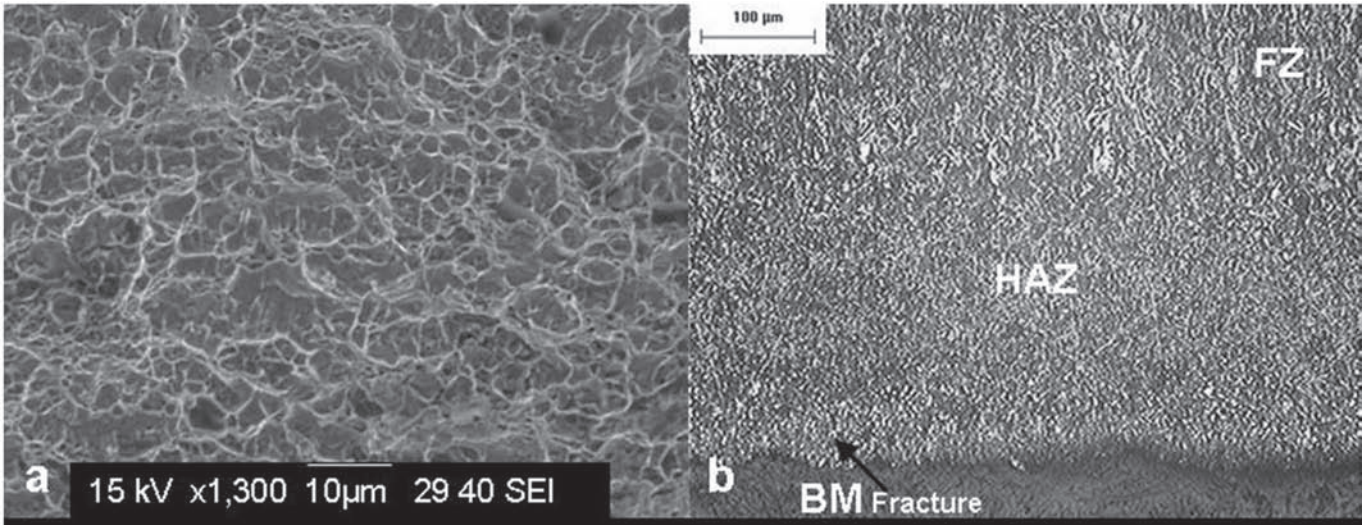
(a) SEM micrograph showing the ductile fracture appearance of the BM consisting of a typical dimple fracture rupture and (b) optical micrograph showing the fracture location in a Laser CO₂ welded strip.
